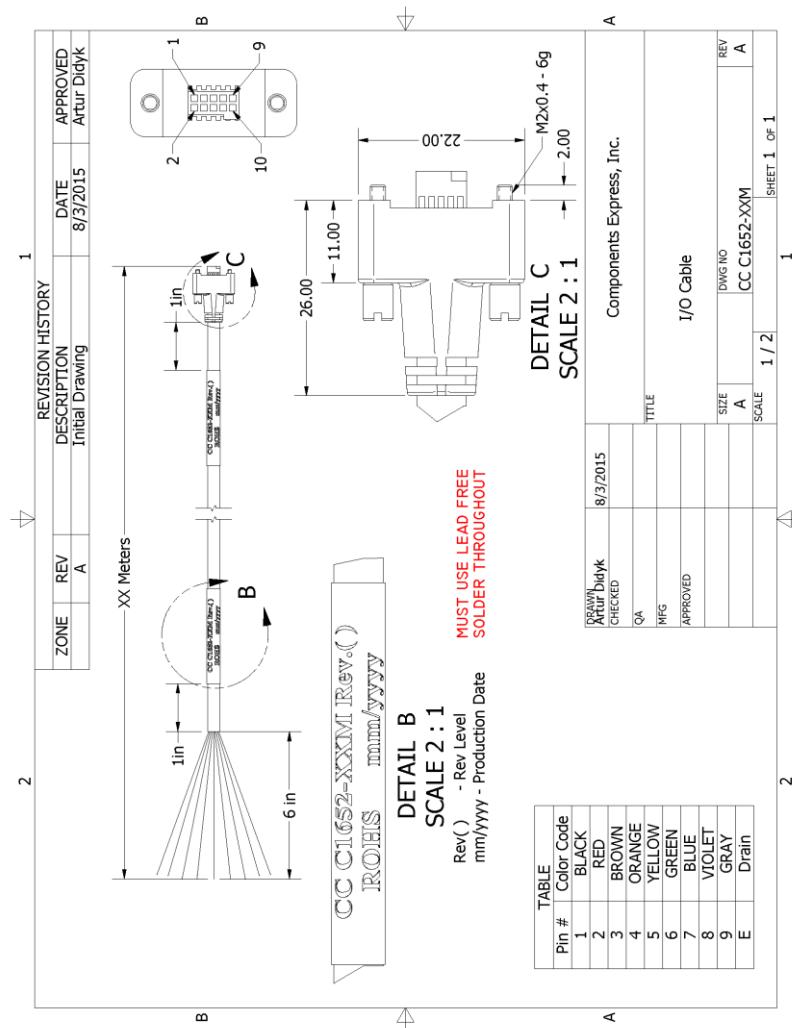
Cable Assembly G3-AIOC-BLUNT2M Mechanical Drawing
